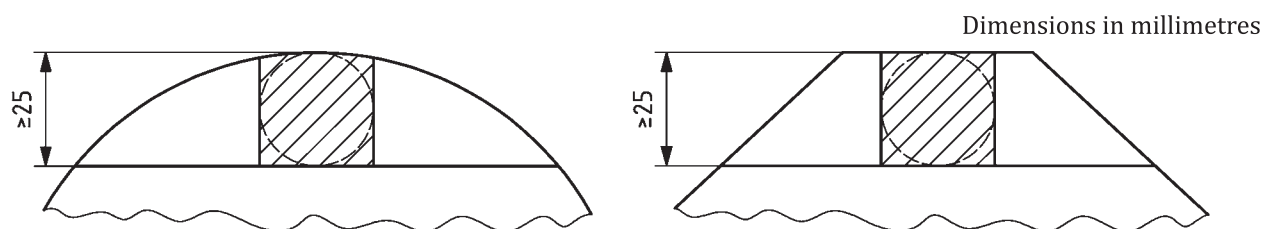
Diameter and the inscribed circle diameter of the test piece
